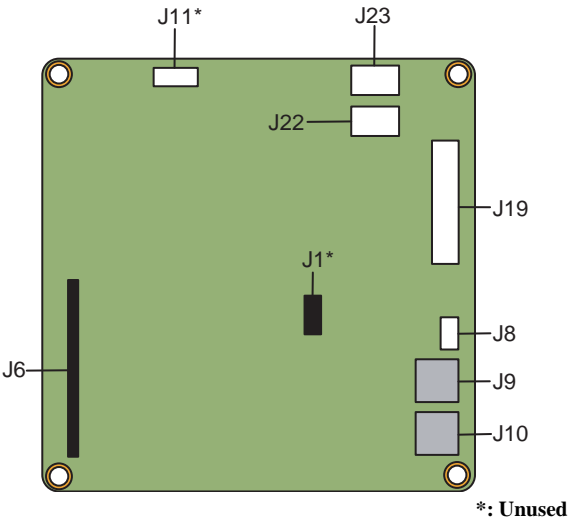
Connector Layout of the HEATER CONT BOARD ASSY
